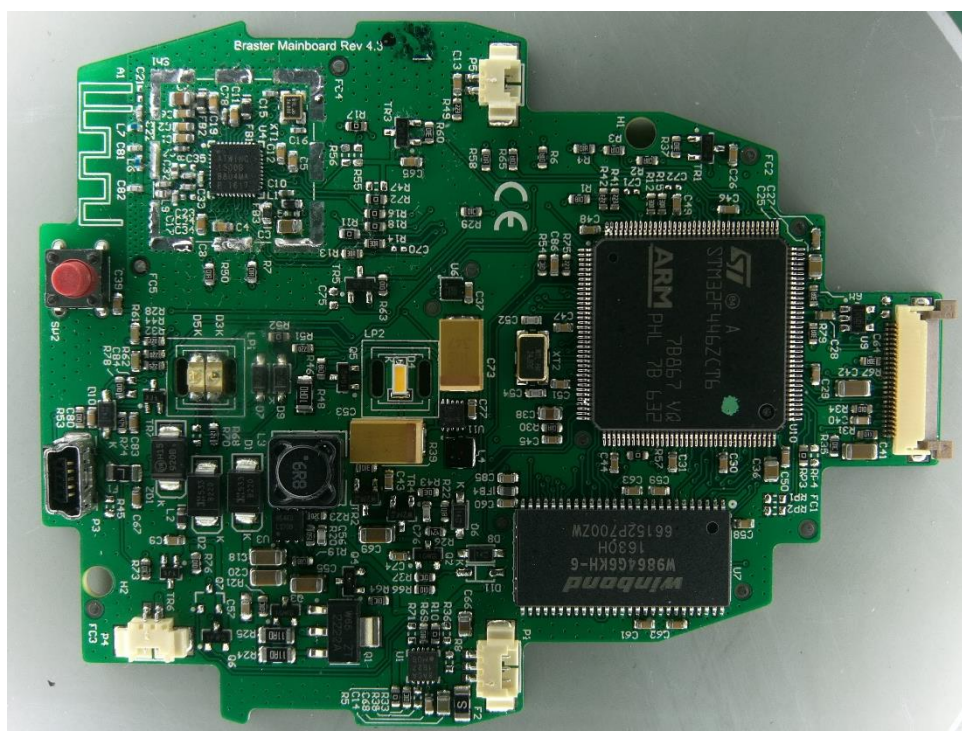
Top view of the Main Board PCB (without RF shield)
